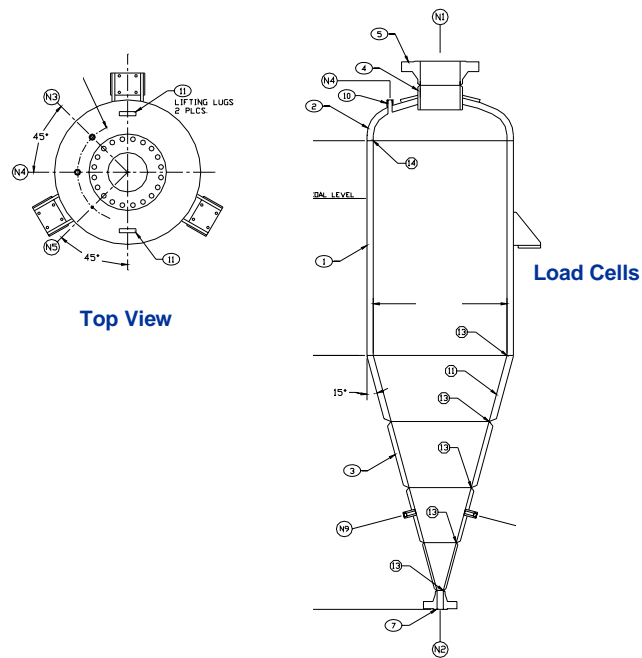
700-gal High Pressure Discharge Tank (Drawing 7RE6393)
